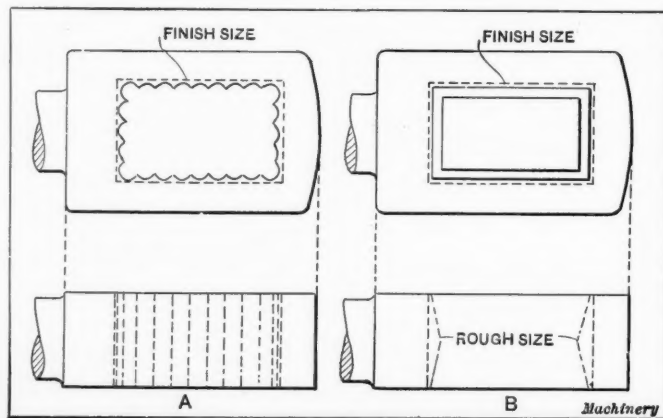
(A) Rod End Blocked Out by Drilling. (B) Rod with Forged Hole
